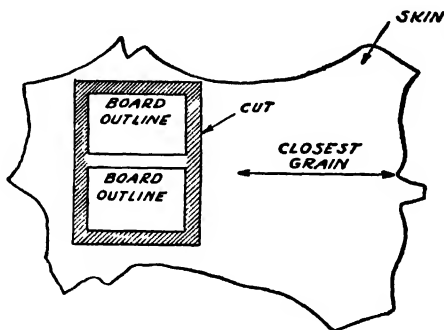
Shaded area marks turn-in margins and back that will have to be thinned down by paring.
